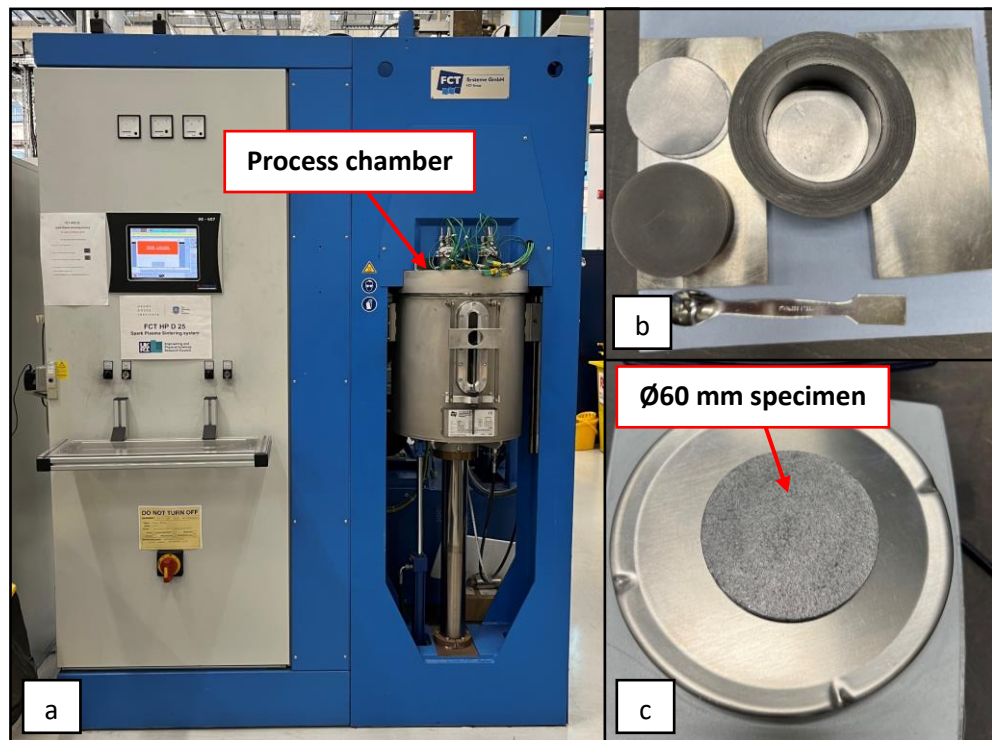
FAST Furnace Type HP D25 (a); die assembly (b); specimen after FAST processing (c).
